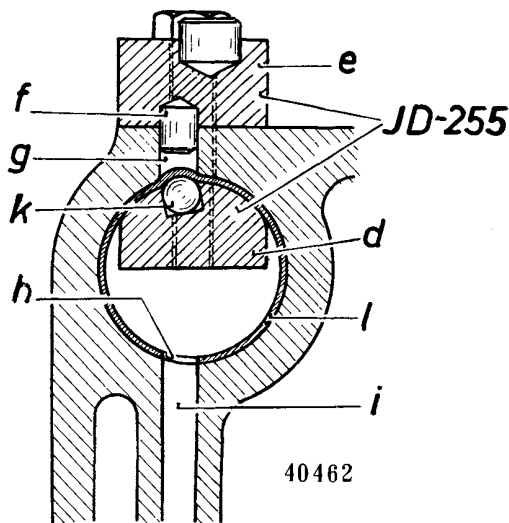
Securing a Balancer Shaft Bushing, Using Special Tool No. JD 255 (Sectional View)
